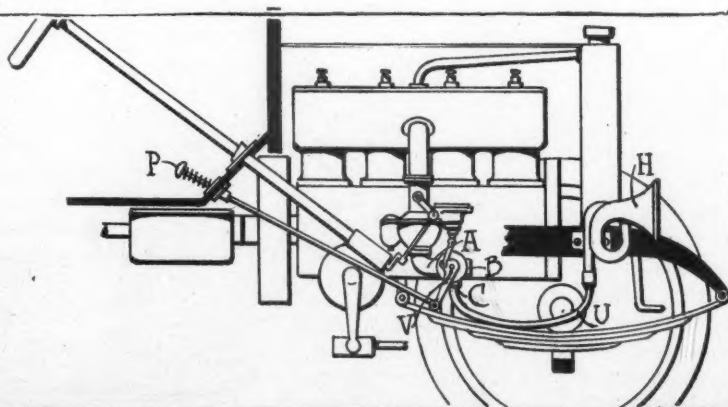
MAKING THE CARBURETOR BLOW THE HORN
